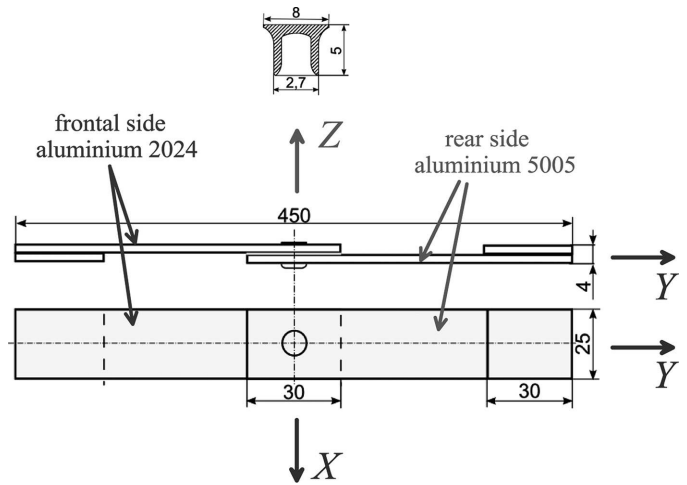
Rivet C-SKR by Bollhoff, and the hybrid SPR specimen dimensions
